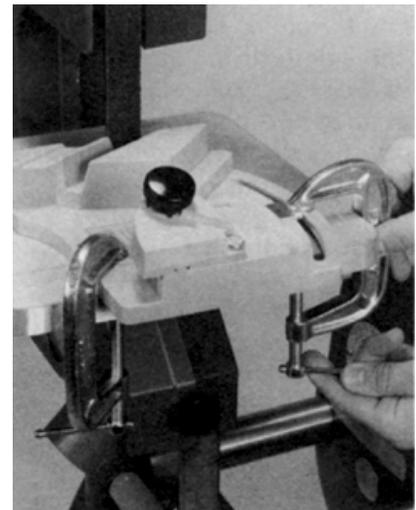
Clamp the sharpening guide to within 1/16" of the belt.
